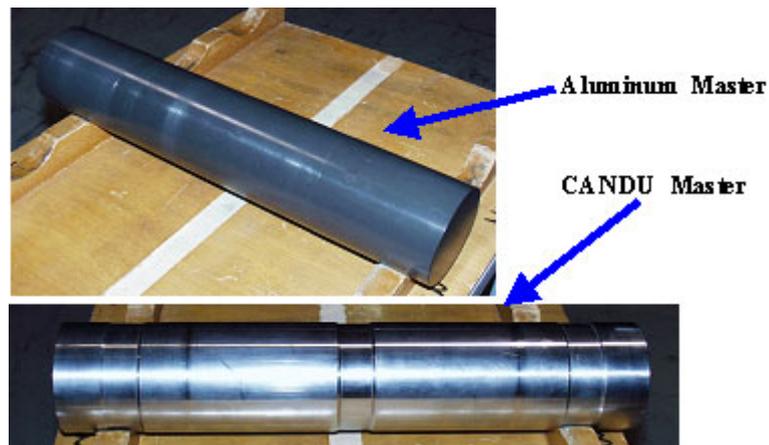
Aluminium Master and CANDU 37-Element Fuel Master
